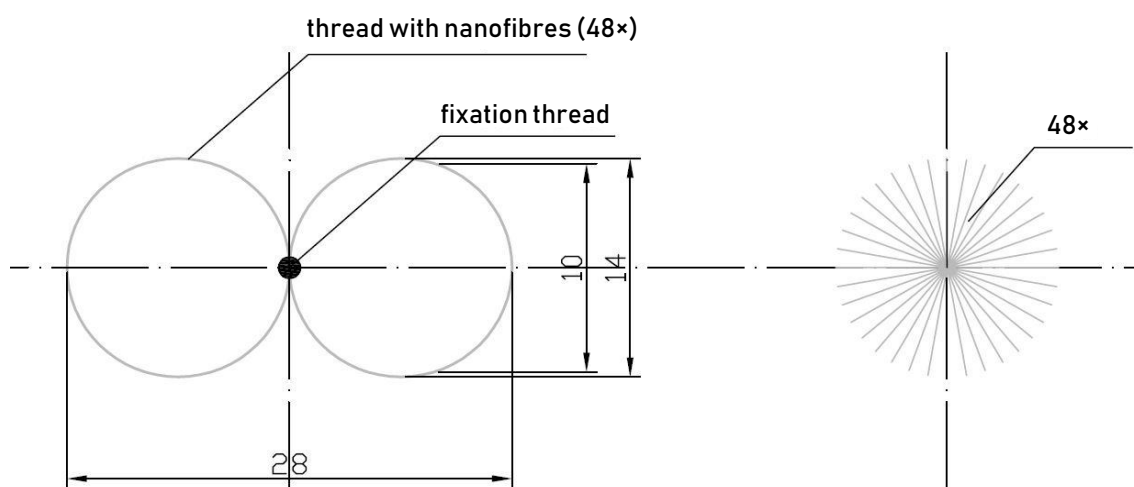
Technical drawing of the circular arrangement. Dimensions in mm.
